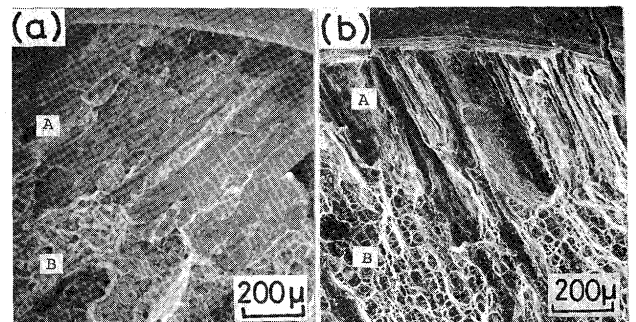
Fractographs of stress corrosion cracking (a) ST direction specimen (b) LT direction specimen
